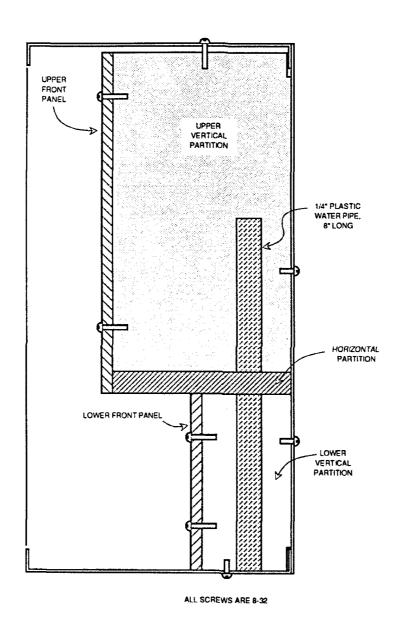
ENCLOSURE PARTITION ASSEMBLY
